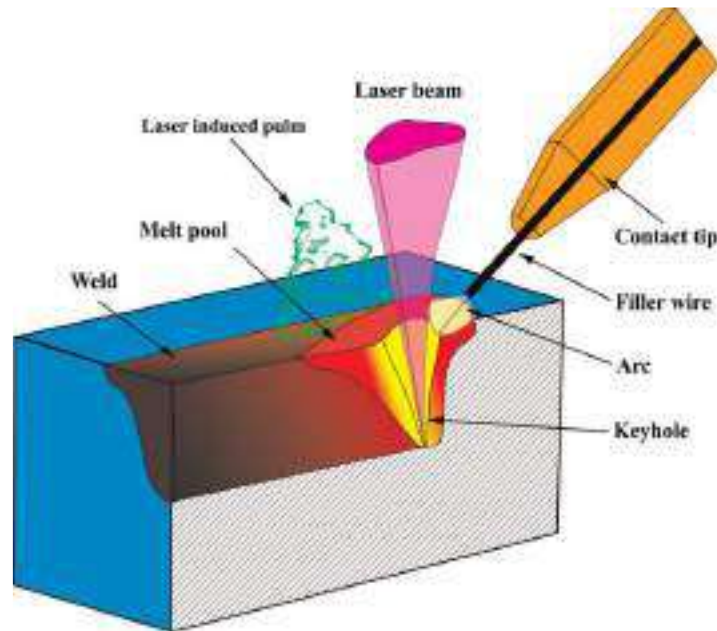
The keyhole formation and laser welding using keyhole mode (Tayebi et al., 2022).
